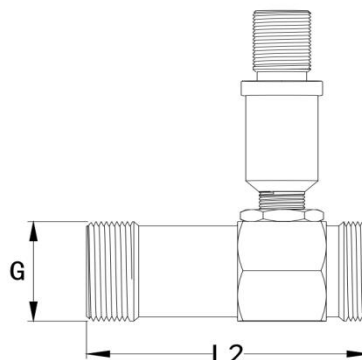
(C) DN4~DN10 threaded turbine flow sensor (including straight pipe section) dimensional drawing
